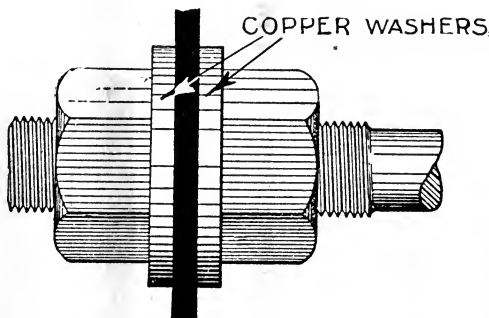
,920.—Stay-rod or through-stay, especially adapted to short boilers of large diameter. The most common and simple form is a plain rod threaded at the ends. The rod passes through the steam space and the ends are fastened to the heads. The length is adjusted in various ways, the simplest being by nut and washers as here shown. The copper washers prevent abrasion of the plates by the nuts and act as packing in securing a tight joint. In place of the nuts the rod is sometimes bolted to angle irons which are riveted to the heads. In this case, turn buckles are used for adjusting the length.
